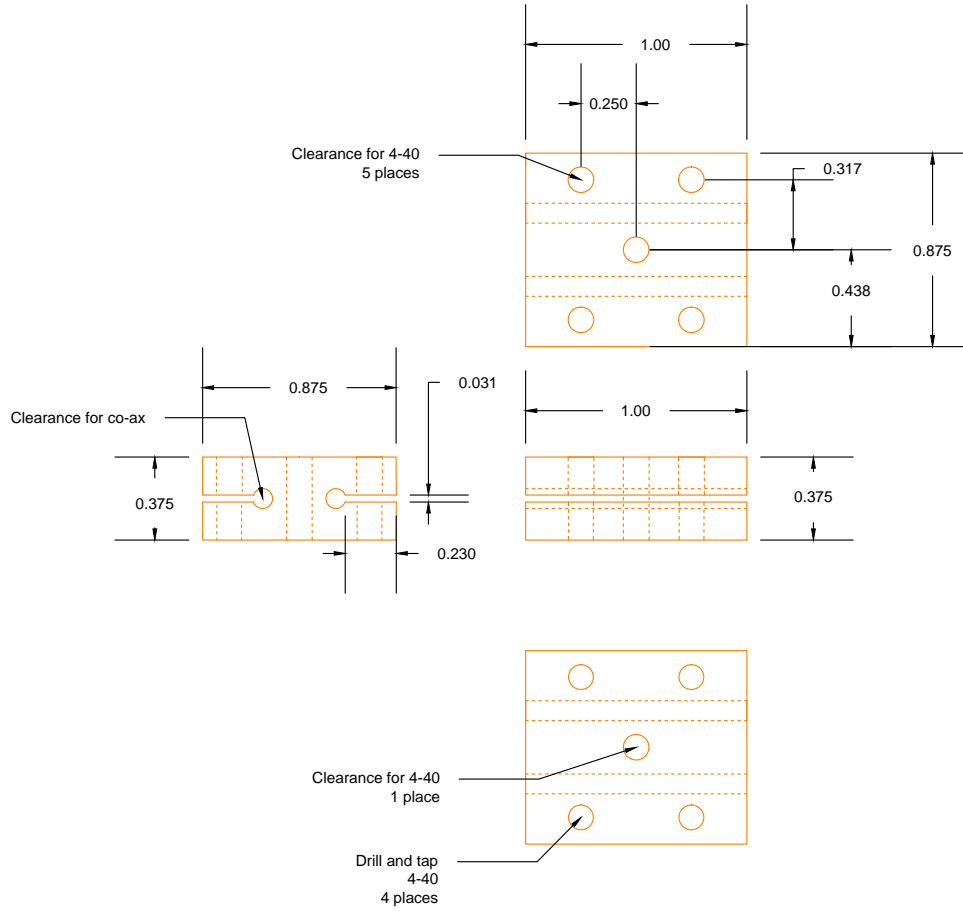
Design of the holder used to heat sink the stainless steel coaxial cable
